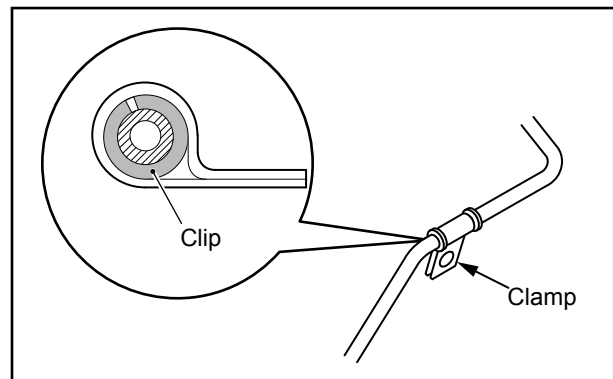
Low-pressure Fuel Pipe and Clip - Inspect
